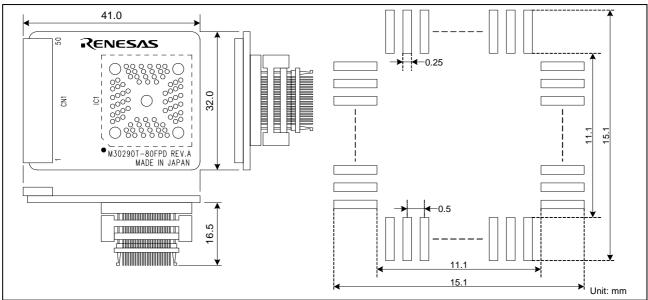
External dimensions and a sample foot pattern of the M30290T-80FPD
